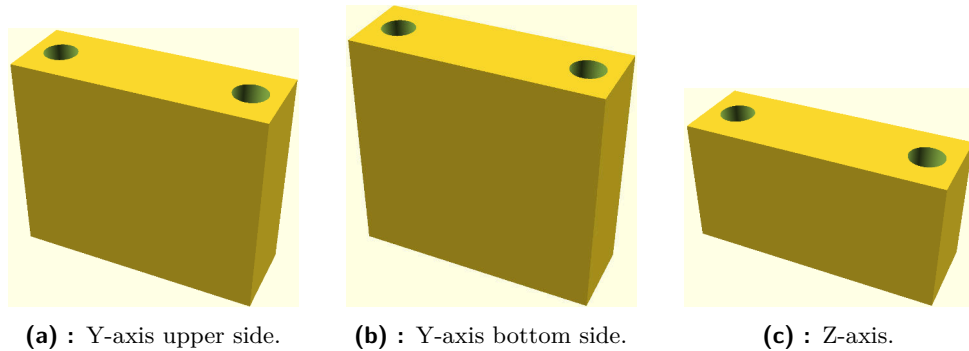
Underlay for lifting linear rod holders to the motor axis.
